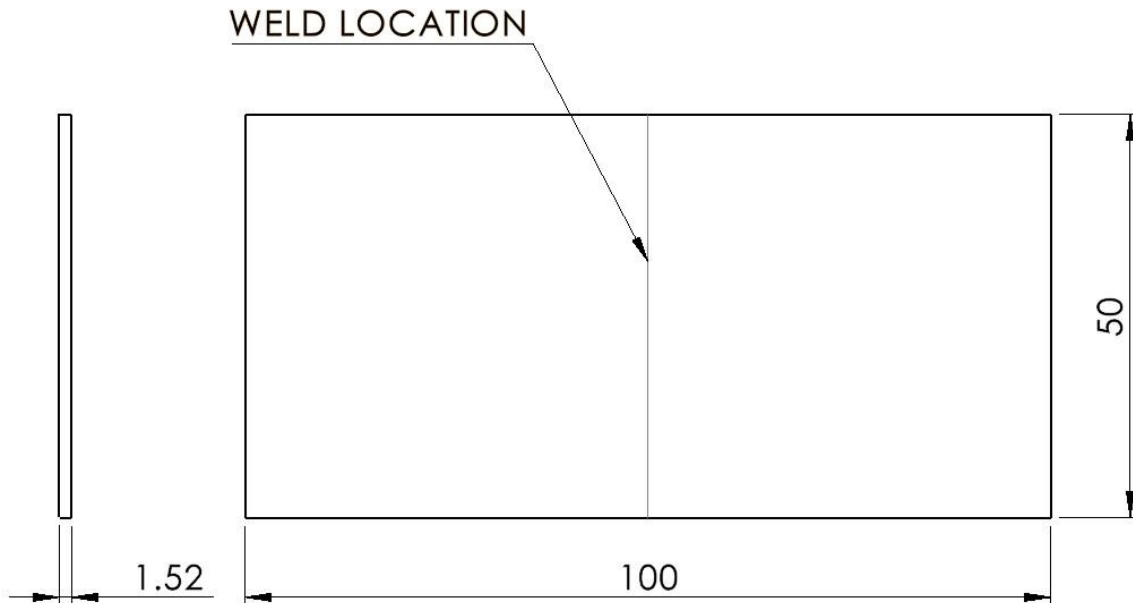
Drawing of the sample geometry including the butt weld.
